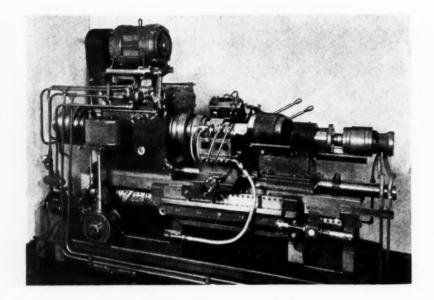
After the Nitriding of the Bore and the Performing of Two Grinding Operations, the Outside Diameter is Semifinish-turned, Using the Driving Ring to Engage the Headstock Fixture
